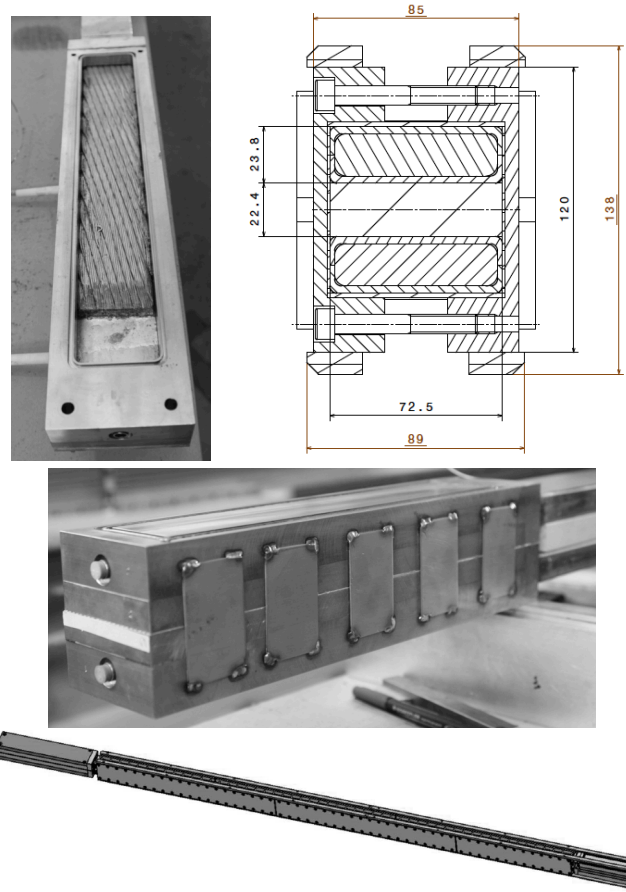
Assembly of the EDIPO sample. From top, soldering of the cable into the termination box, sample cross section, bottom joint and 3D of the assembled sample.
